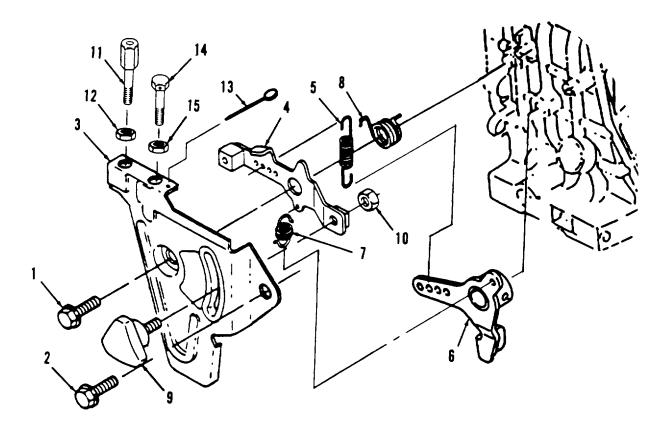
Regulator Bracket Assembly Repair and Replacement.
